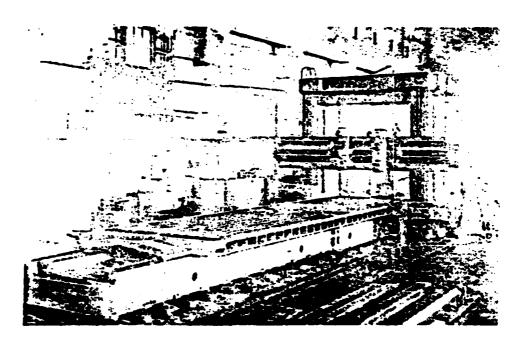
Combined longitudinal-milling-planing machine tool 7288Φ.
